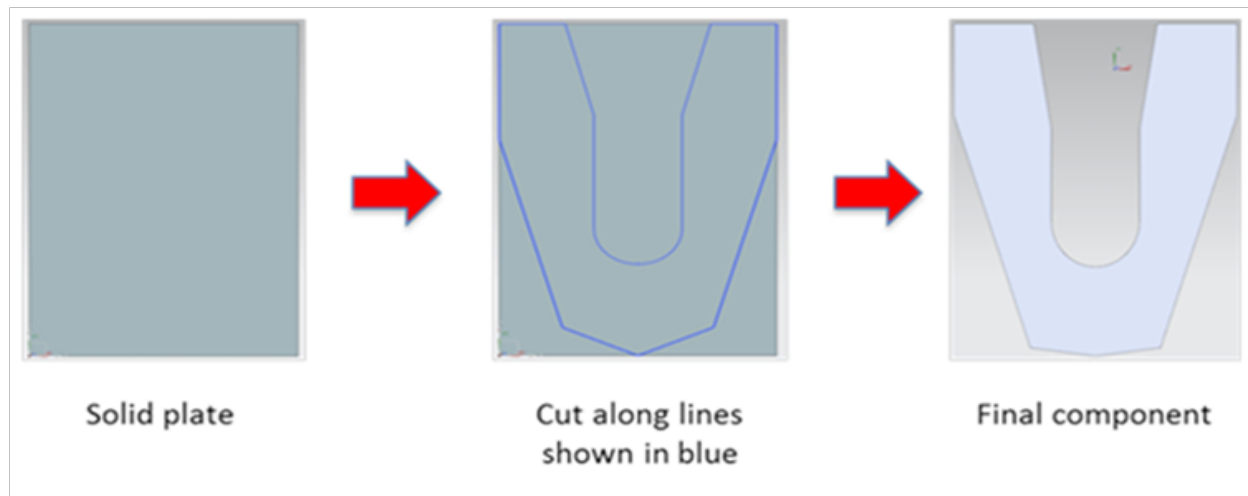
Manufacture of Front Plate Component in V-Hull Assembly
